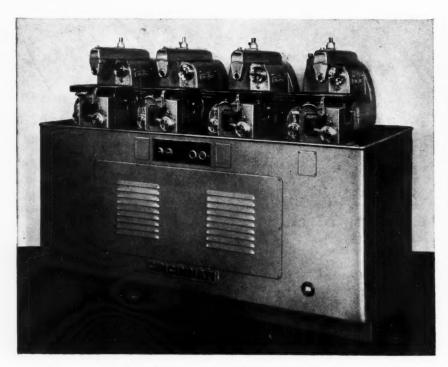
Unit Type Production Milling Machine Brought out by the Cincinnati Milling Machine Co.
